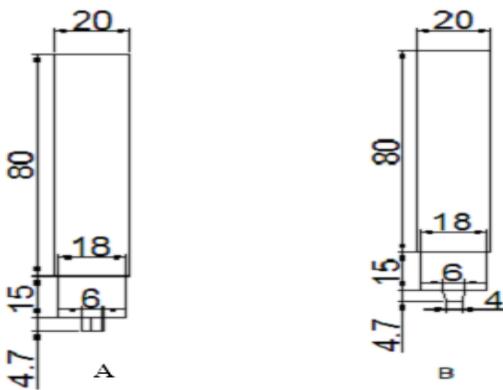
Tool Dimensions (a) With Hexagonal Pin
